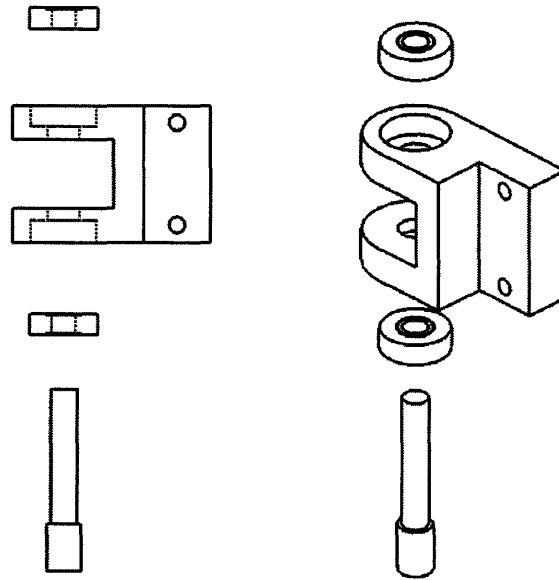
Assembly of the bearings, shouldered rod, and hand piece.
